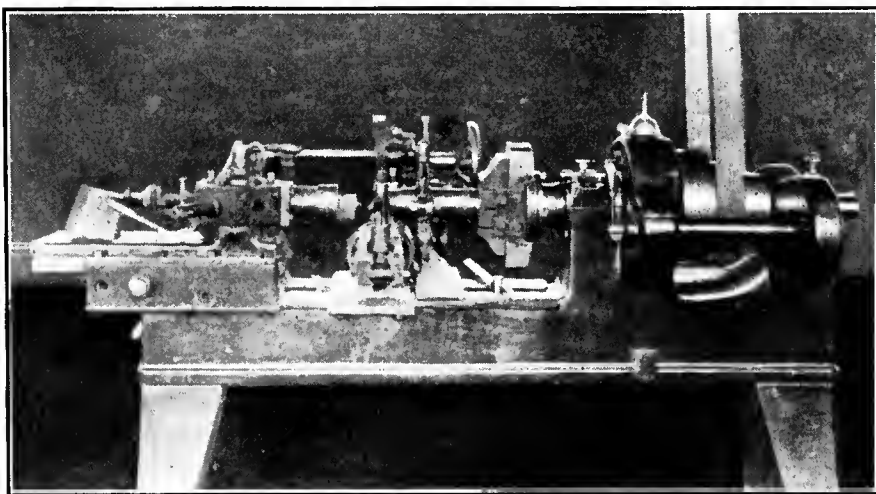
TURNING BRASS SOCKETS ON AN ACME MACHINE TOOL CO. TURRET LATHE.
